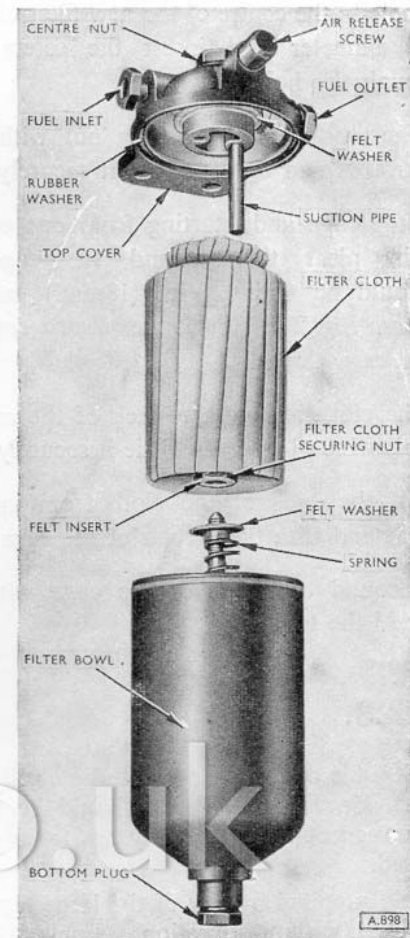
Exploded view of main fuel filter (C.A.V.)
